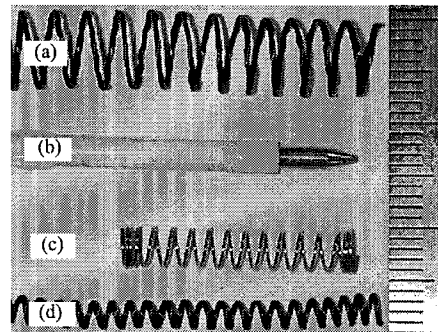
Shape of composite springs (CS) and common metal spring (MS) of a mechanical pen. (a) composite spring with 8mm diameter, (b) a mechanical pen, (c) a metal spring (MS), and (d) a composite spring with 3mm diameter.
